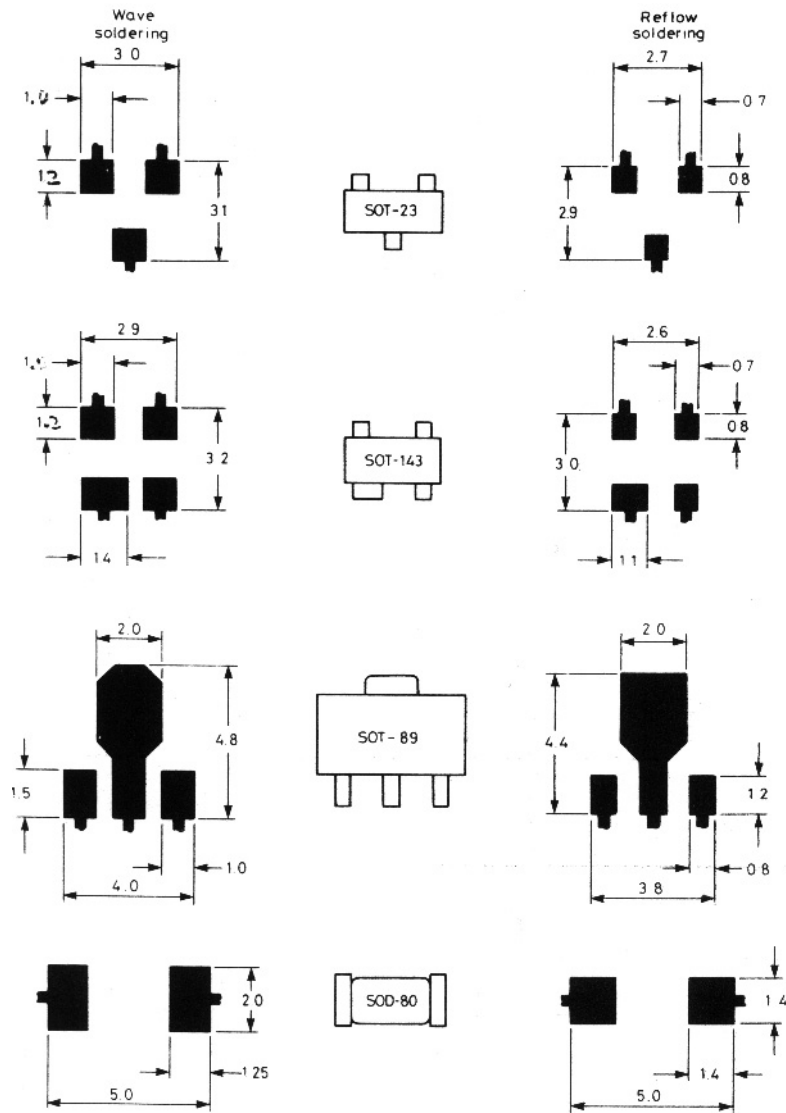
Solder land dimensions for SMD transistors and diodes [6.2].
